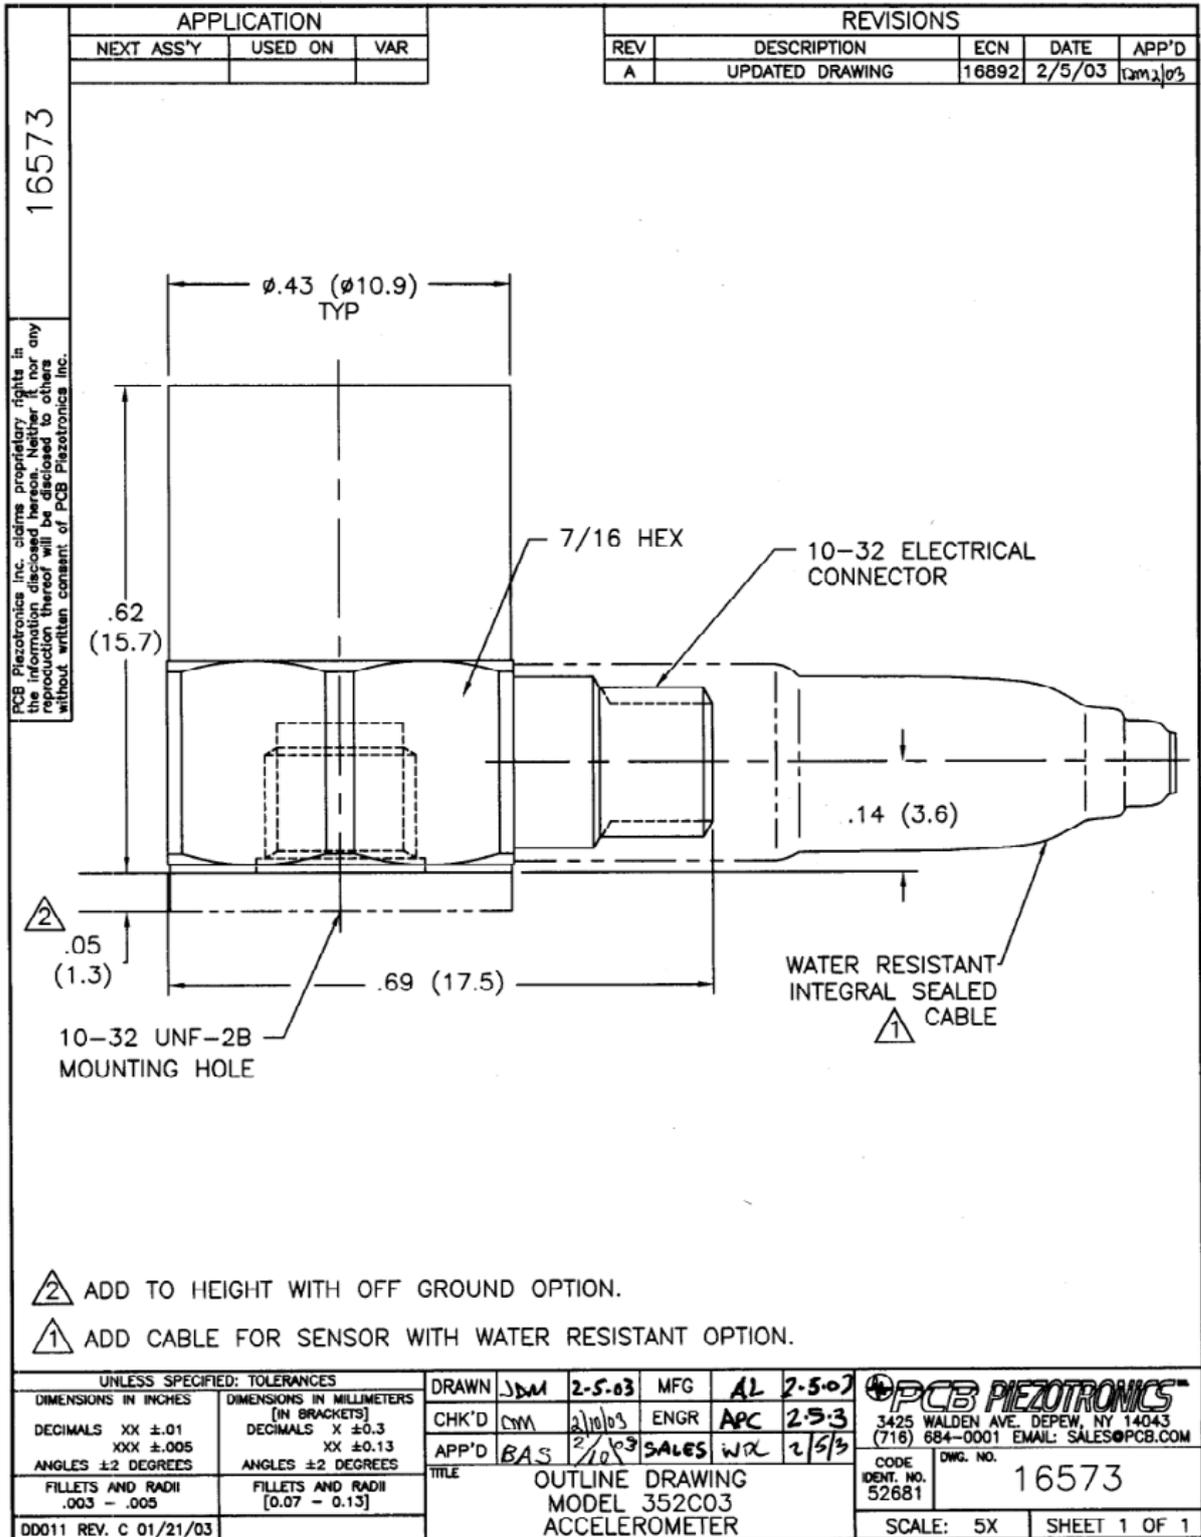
Mechanical drawings of monoaxial accelerometers and related interfaces (Witworth BSF 3/16"x32 or M6x0.75 course shall be provided on the tested item for fixture if needed)
